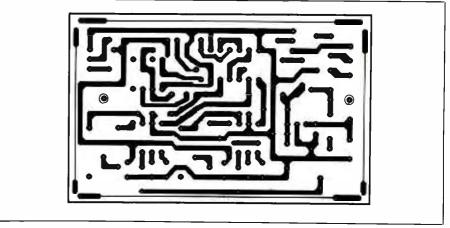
Actual-size etching-and-drilling guide for pc board.
